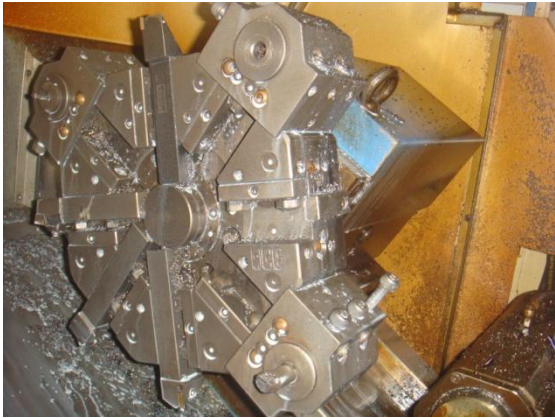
Showing tool holder fixture installed on dynamometer installed on turret.
